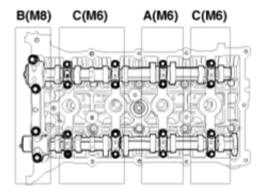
Identifying Proper Locations For Installing Camshaft Bearing Caps Courtesy of KIA MOTORS AMERICA, INC.
